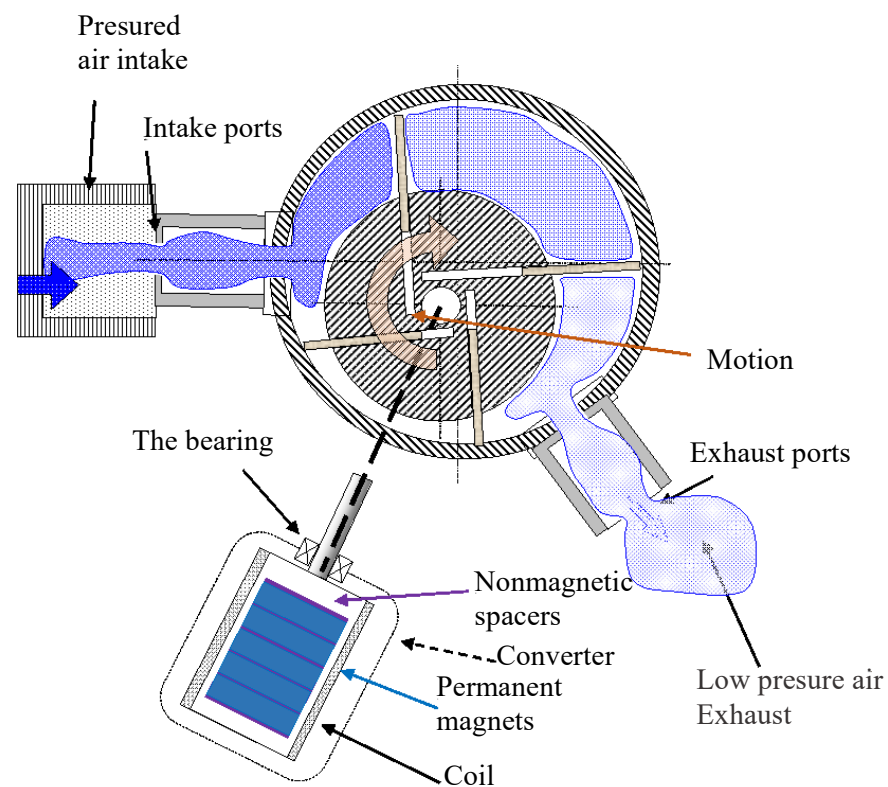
The design of an alternative non-combustion engine without a gearbox and vane air motor.
